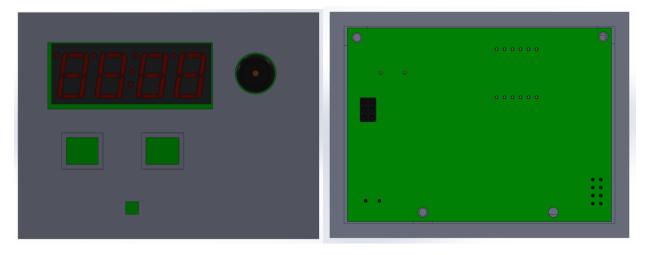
3D model of the PCB enclosure in SolidWorks. An engineering drawing is included in Appendix D.
